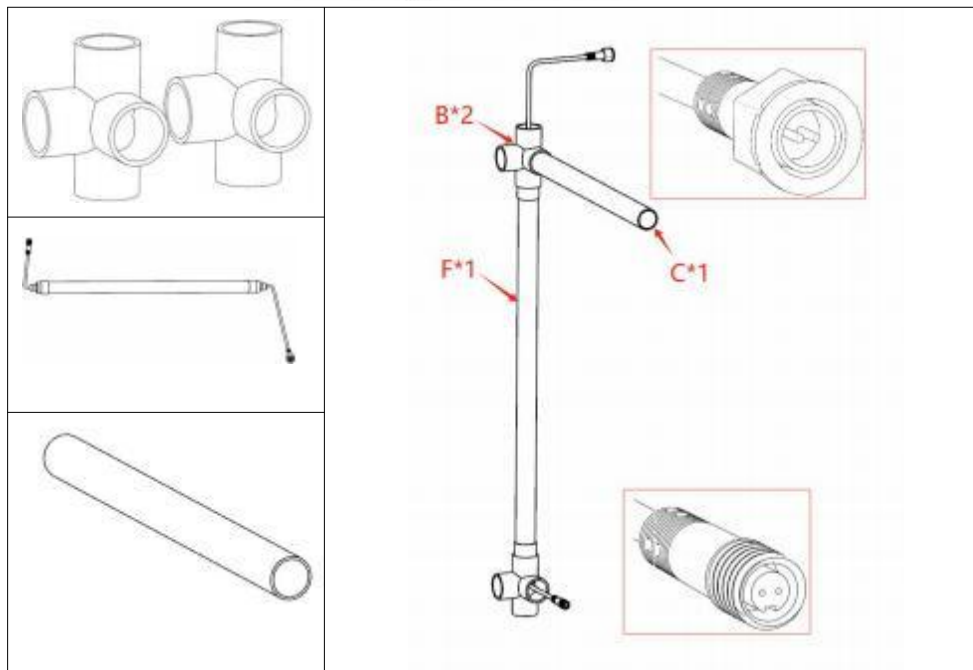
According to the figure, assemble a 355MM long horizontal tube, two 4-way, and 1 lamp together for backup (Note: the lamp wire is in the hole of the 4 barrels.)
